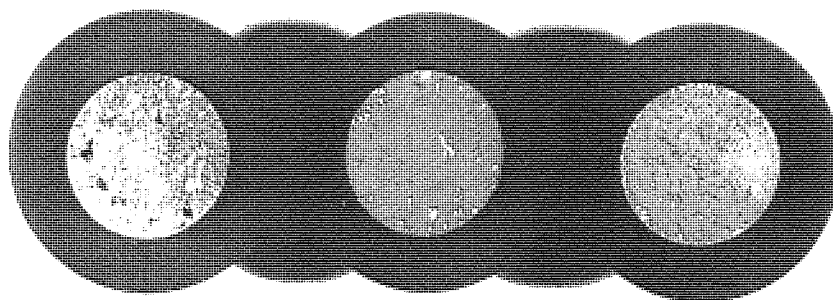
Photograph showing castings in a 'gassed' Alphaset mould(right) and an untreated mould(left)
